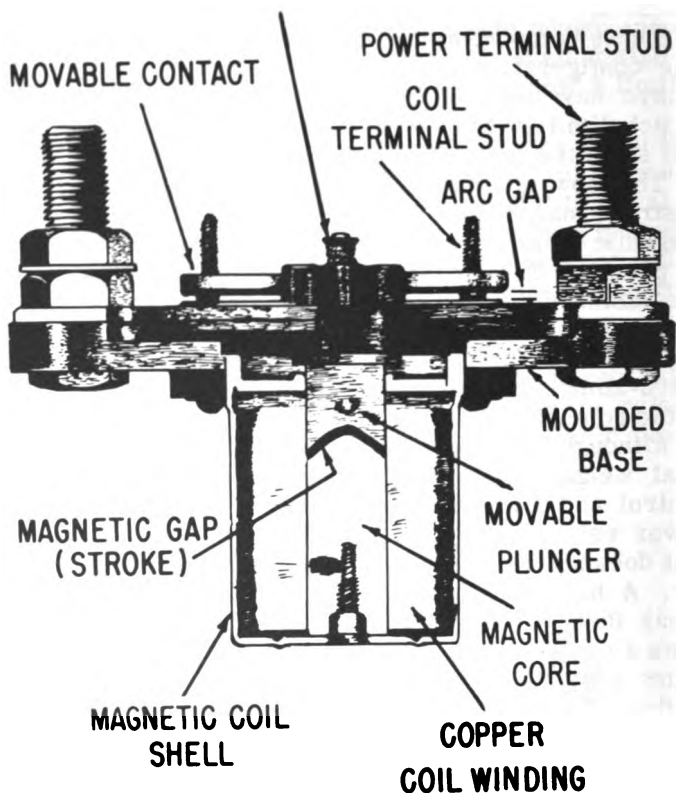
Cutaway view of a 400-ampere, single-pole, single-throw contactor relay.
